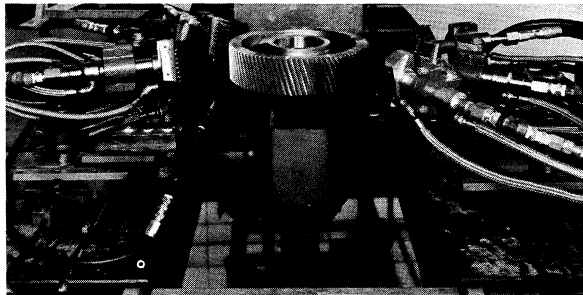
A setup for flame-hardening the teeth on an external helical gear. *Courtesy Tocco Div.
